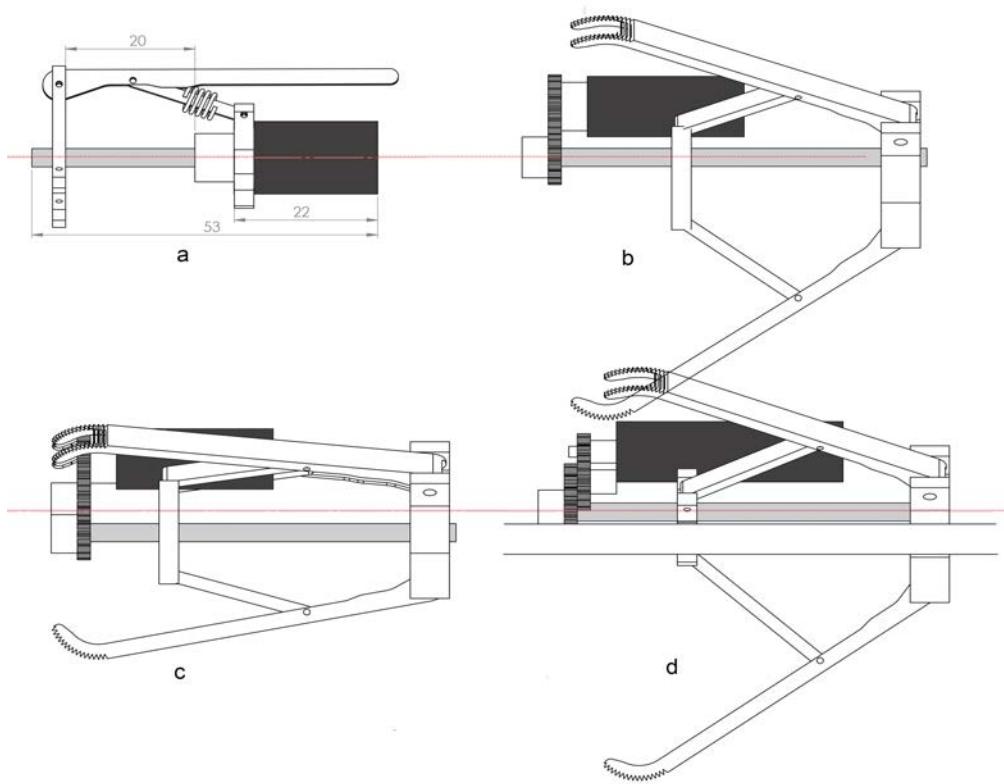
Different clamp designs with the motor in the clamping module. a: first design with a Pololu micro motor in series, b: second design with a Pololu micro motor parallel, c: third design is the same as second design, but lead screw out of center, d: fourth design with a 10mm Faulhaber gearmotor parallel.
